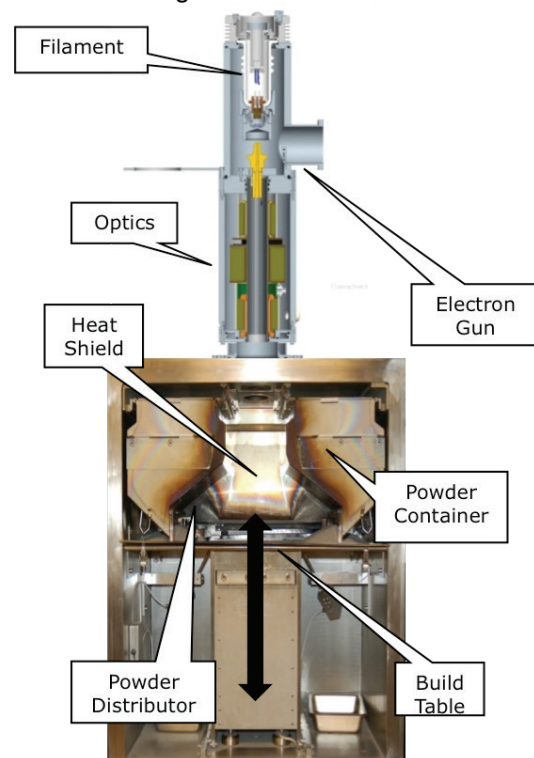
Interior cutaway depicting a generic Arcam EBM machine.
